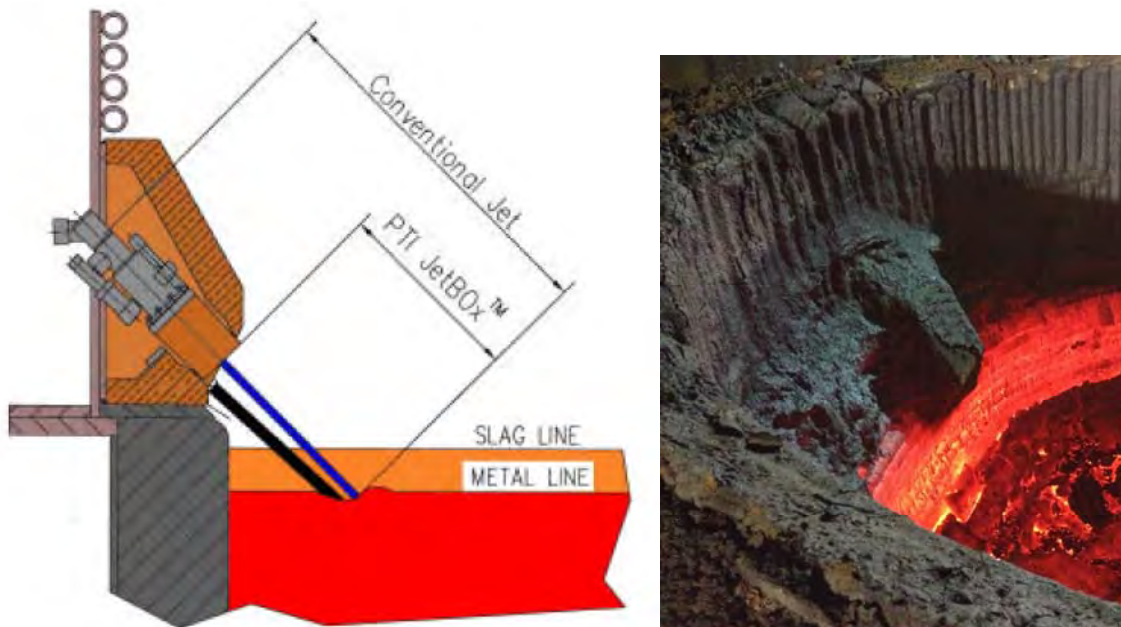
PTI JetBOx™ Installed in sidewall of EAF.
